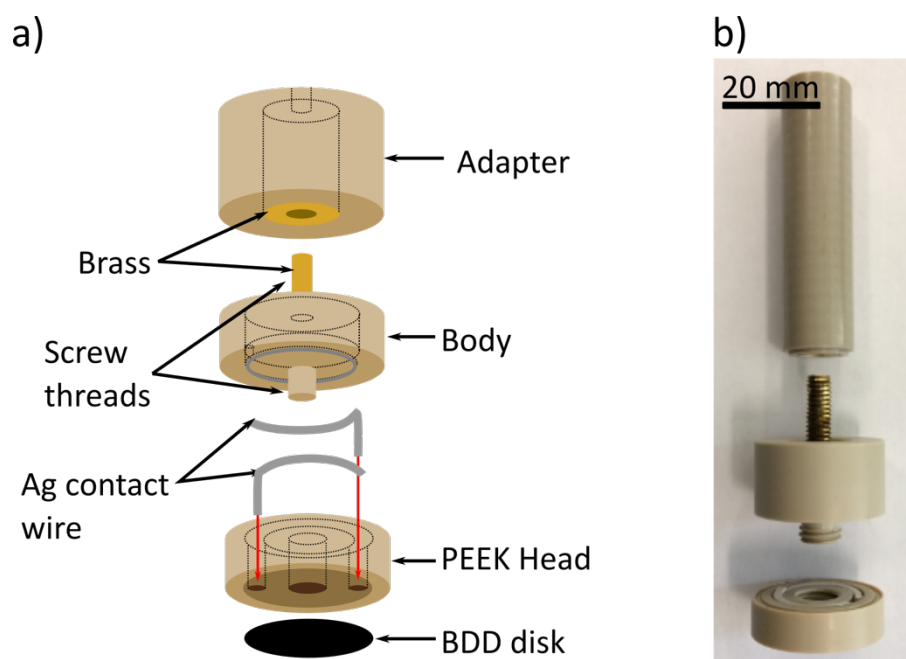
Prototype 1, a) schematic, b) photo, BDD disk sealed in PEEK head with Ag wire contacts screw fit to adapter which screws into RDE body which in turn screws into the rotator motor, electrocal contact kept through brass interiors of adapter and body, scale bar is 25 mm.
